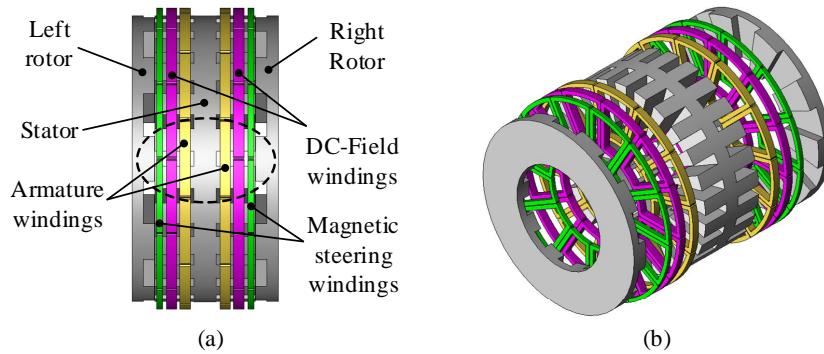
Proposed double-rotor MagD motor. (a) Motor topology. (b) Exploded view.
